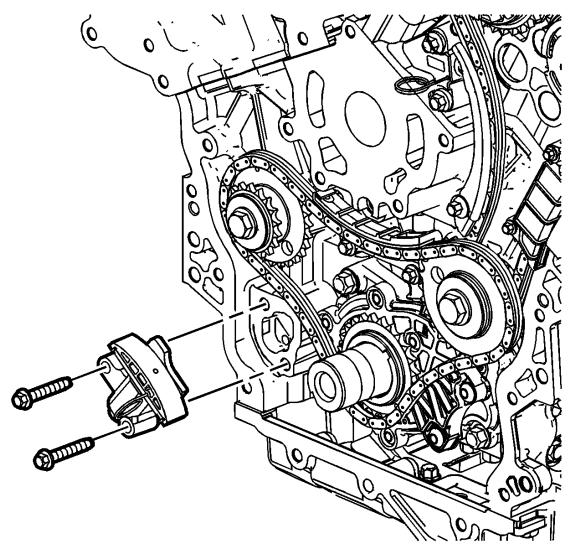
View Of Primary Camshaft Drive Chain Tensioner Courtesy of GENERAL MOTORS COMPANY
